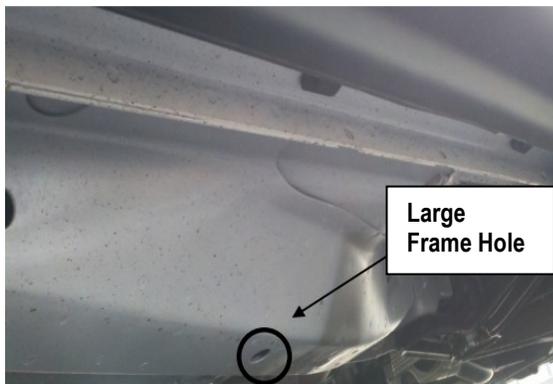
Driver Front Mounting Bracket (DFM+DFS) Assembly
